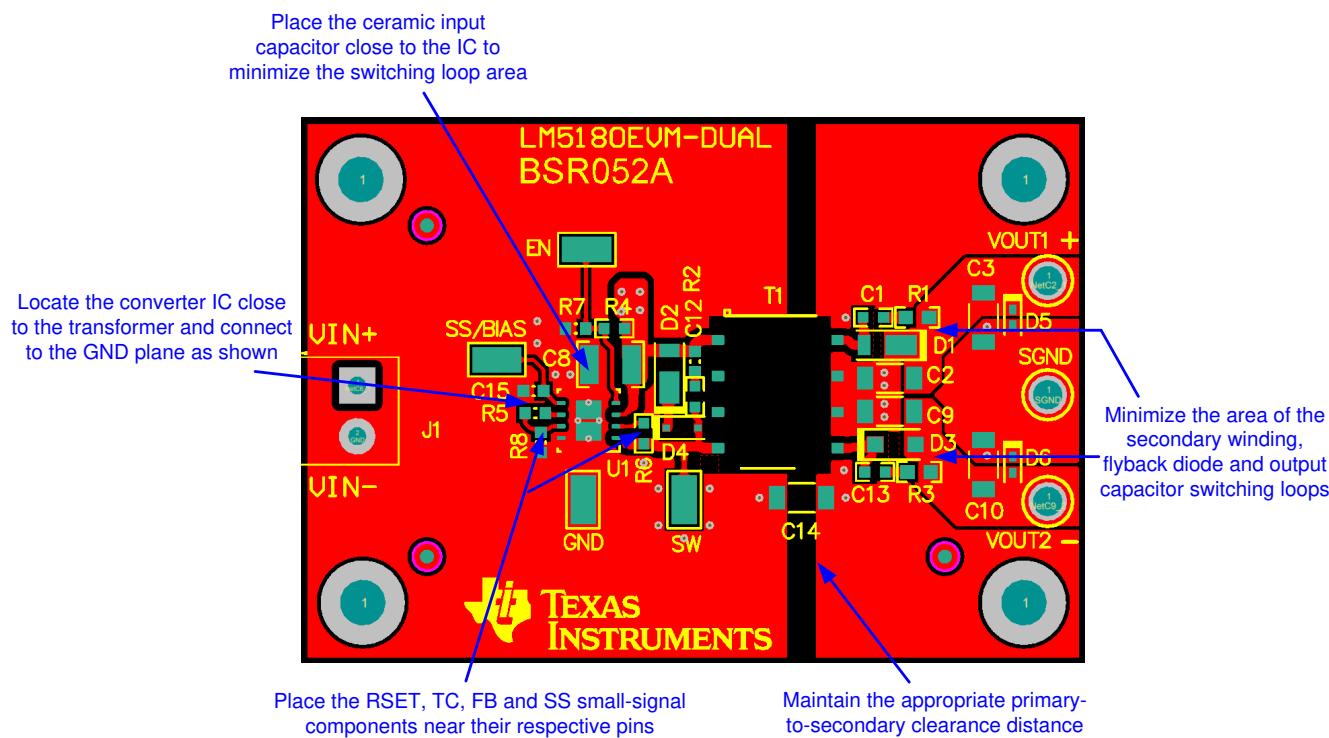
Layout Design Tips for a Dual-output PSR Flyback Converter
